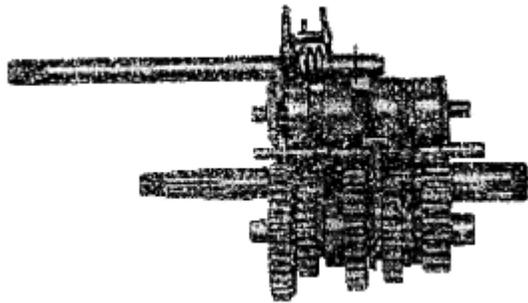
Gearbox with gear-shift mechanism (view from below)
